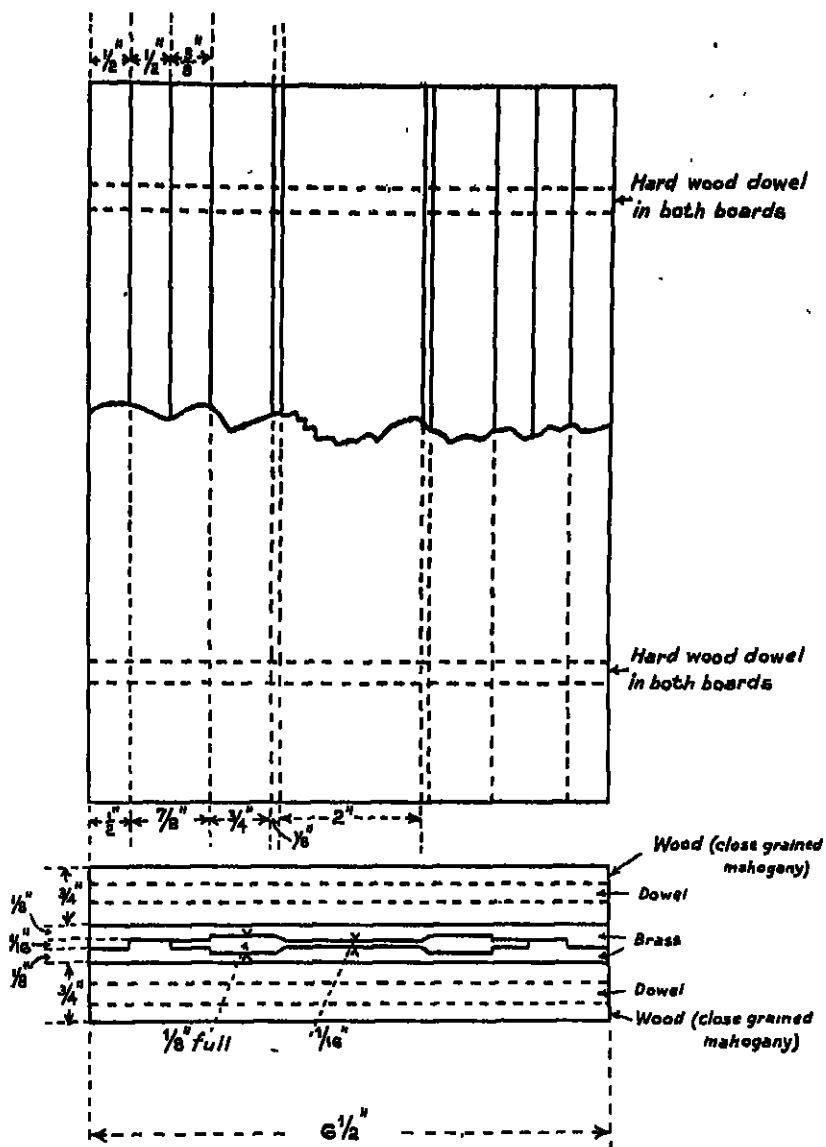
Rolling Boards used in preparing Gutta-Percha Samples for Testing.
